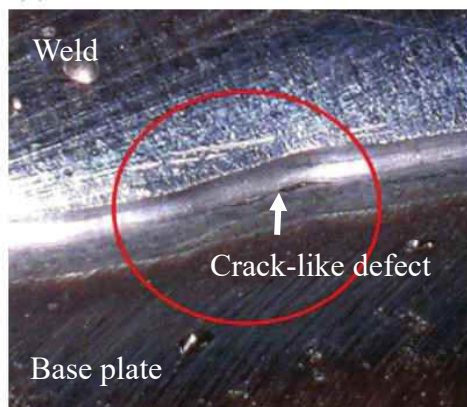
Examples of visual inspection of HFMI treated welds [13]
